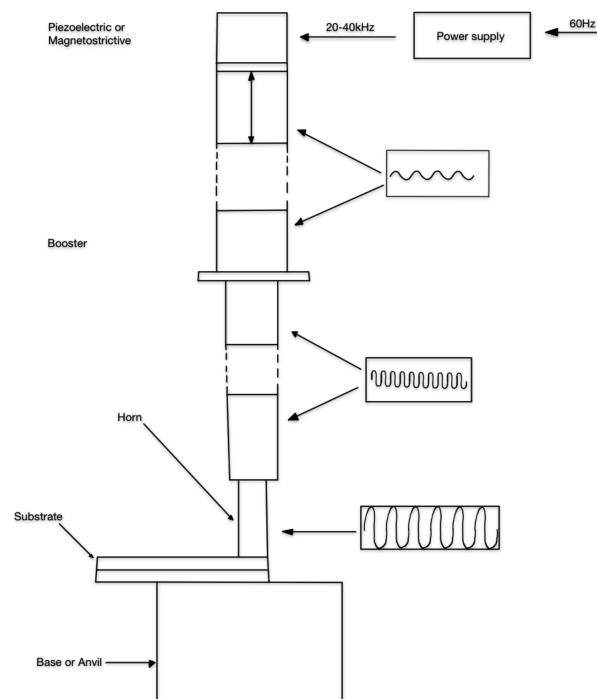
Scheme of ultrasonic welding device based on [1]
